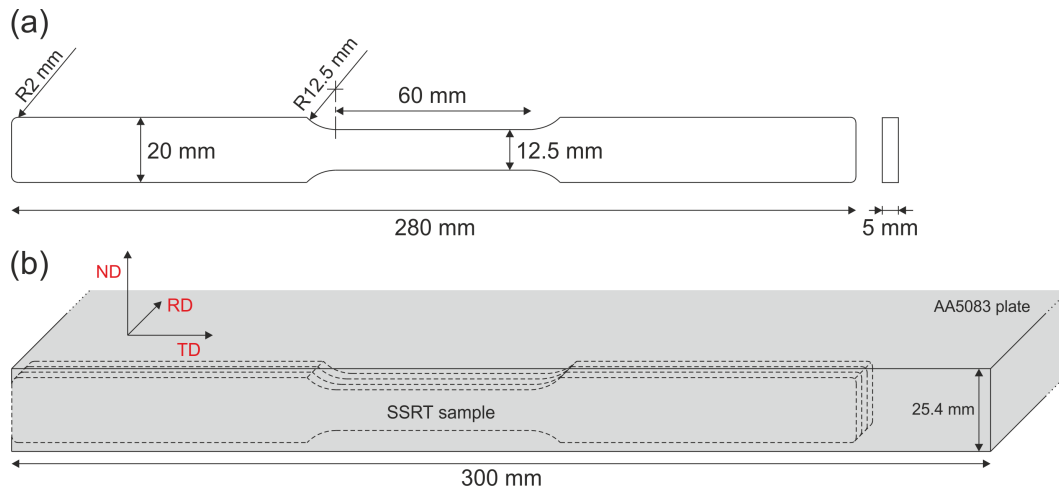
Dog-bone shaped specimens for SSRT: (a) specimen dimensions and (b) sectioning of specimens from AA5083 plate.
